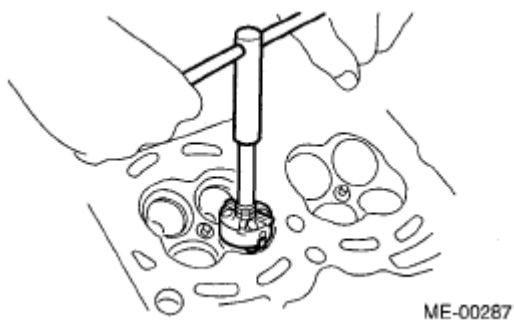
Correcting Contact Surfaces With Valve Seat Cutter
